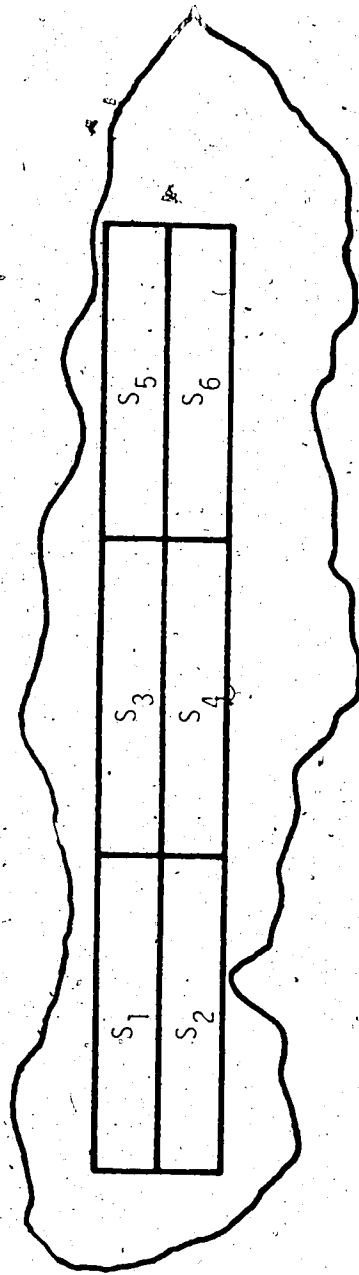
Sawtooth Fracture Segment, Notch Bend Specimen Locations
